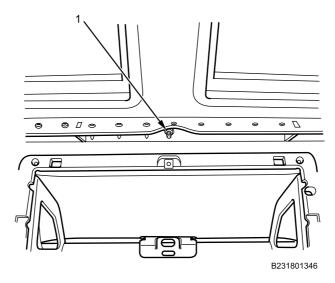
Cross-Vehicle Equipment Bracket Nut Center Interior Location.
